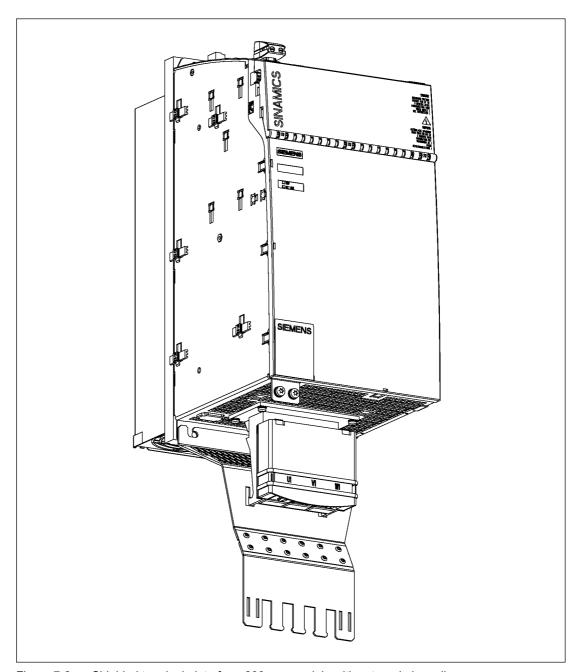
Shielded terminal plate for a 200 mm module with external air cooling
